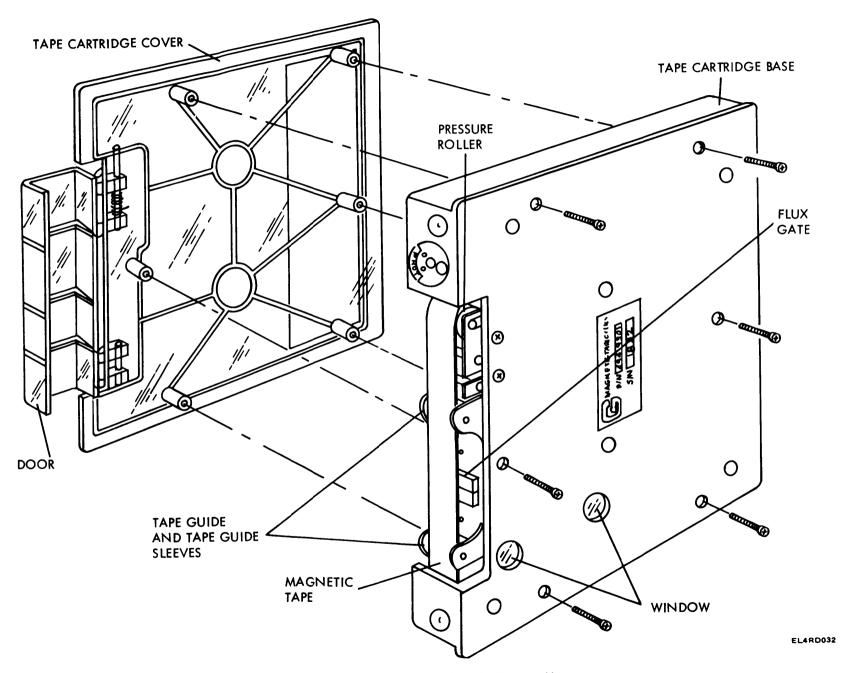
Magnetic Tape Cartridge Disassembly.
